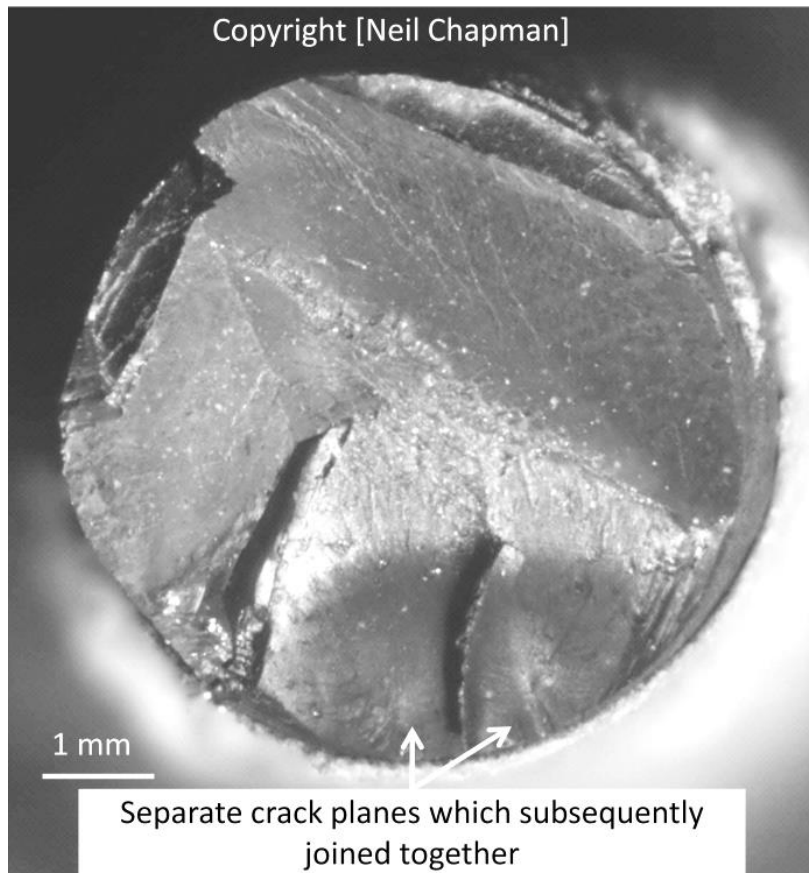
Low powered optical microscope image of two initial flat perpendicular cracks from the corrosion fatigue test using the 10-1-1-1 s waveform and precorroded test specimen
